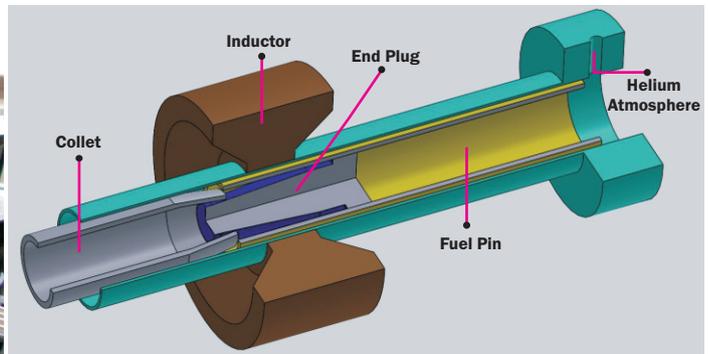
Section view of PFBR pin inside EM coil in helium atmosphere.
